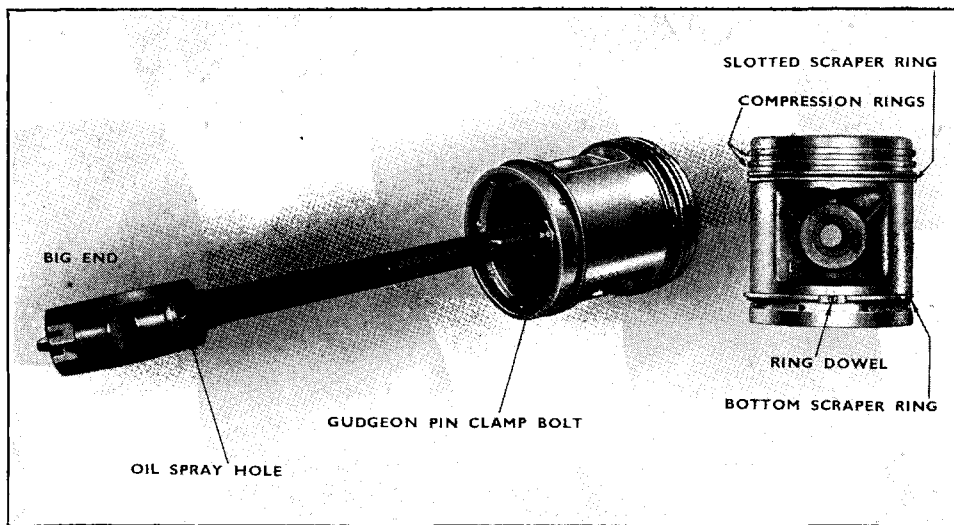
Illustration No. 25.—Piston assembled to connecting rod, also position of piston rings (first type).
